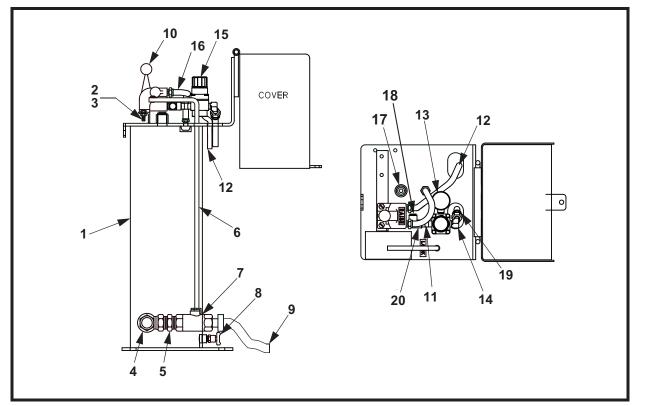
Boot-Lift[®] Control Console Assembly, P/N 38340X-SBL
